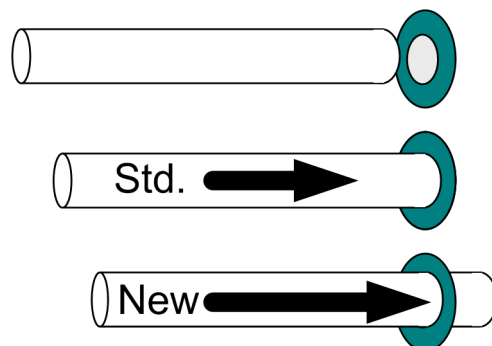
6 Air tight sealing of the PFA hosing due to different installation of the O-Rings
